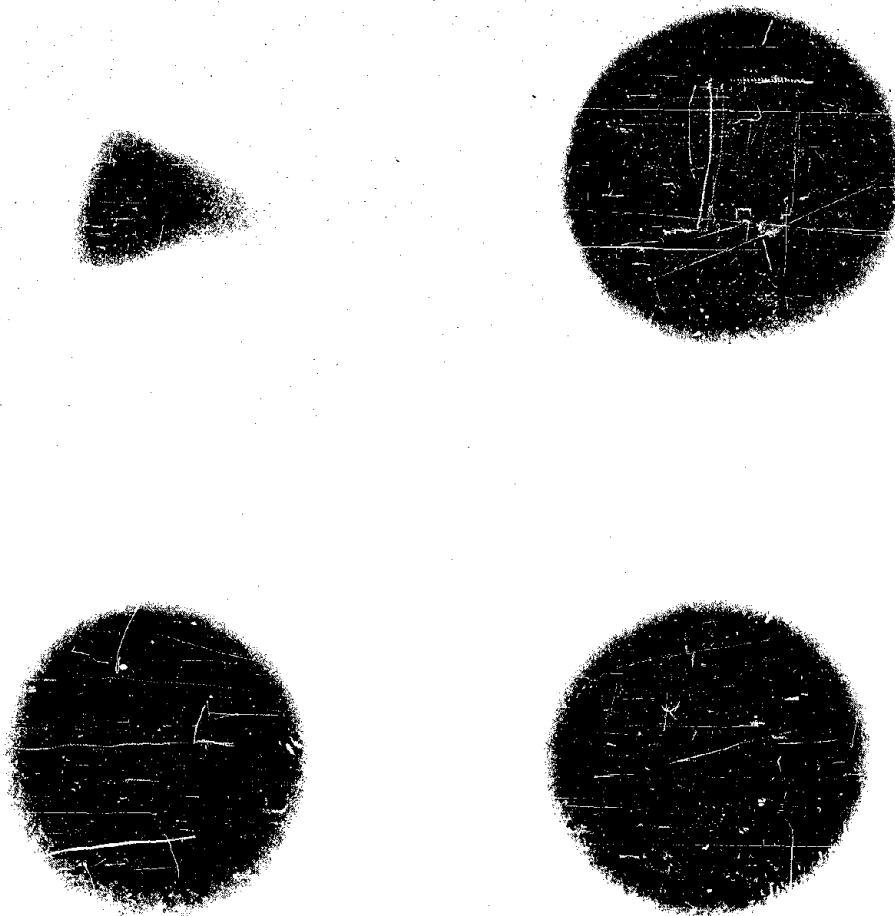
Prints from Microradiographs of As-Brazed Joint and Three Joints Stressed Part Way to Failure (4X)
